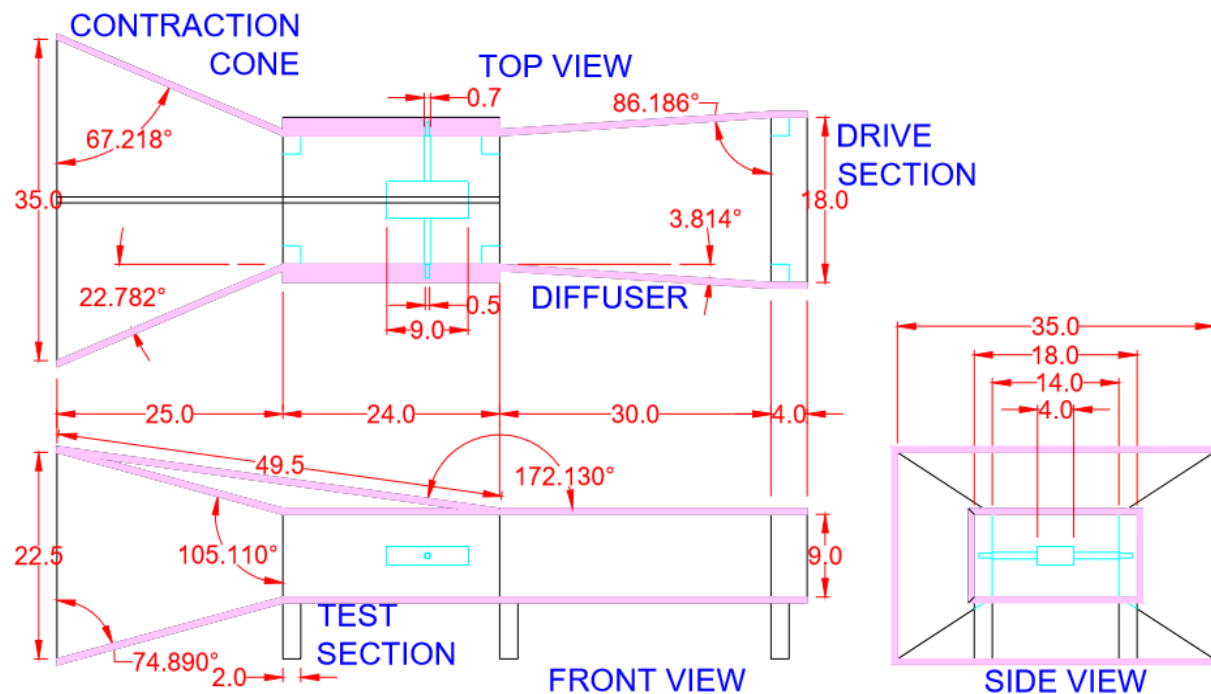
The blueprints for the wind tunnel. The different sections of the wind tunnel are labeled, as well as all relevant measurements. All labeled distances are in cm. Structures designed to support the wind tunnel can be seen in the front view, and the supporting of the foil is outlined in the top and side views.
